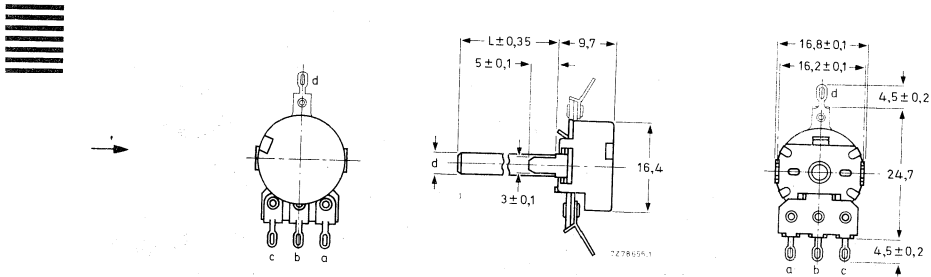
Single potentiometer with twist tags. For dimensions d and L, see Spindles.
